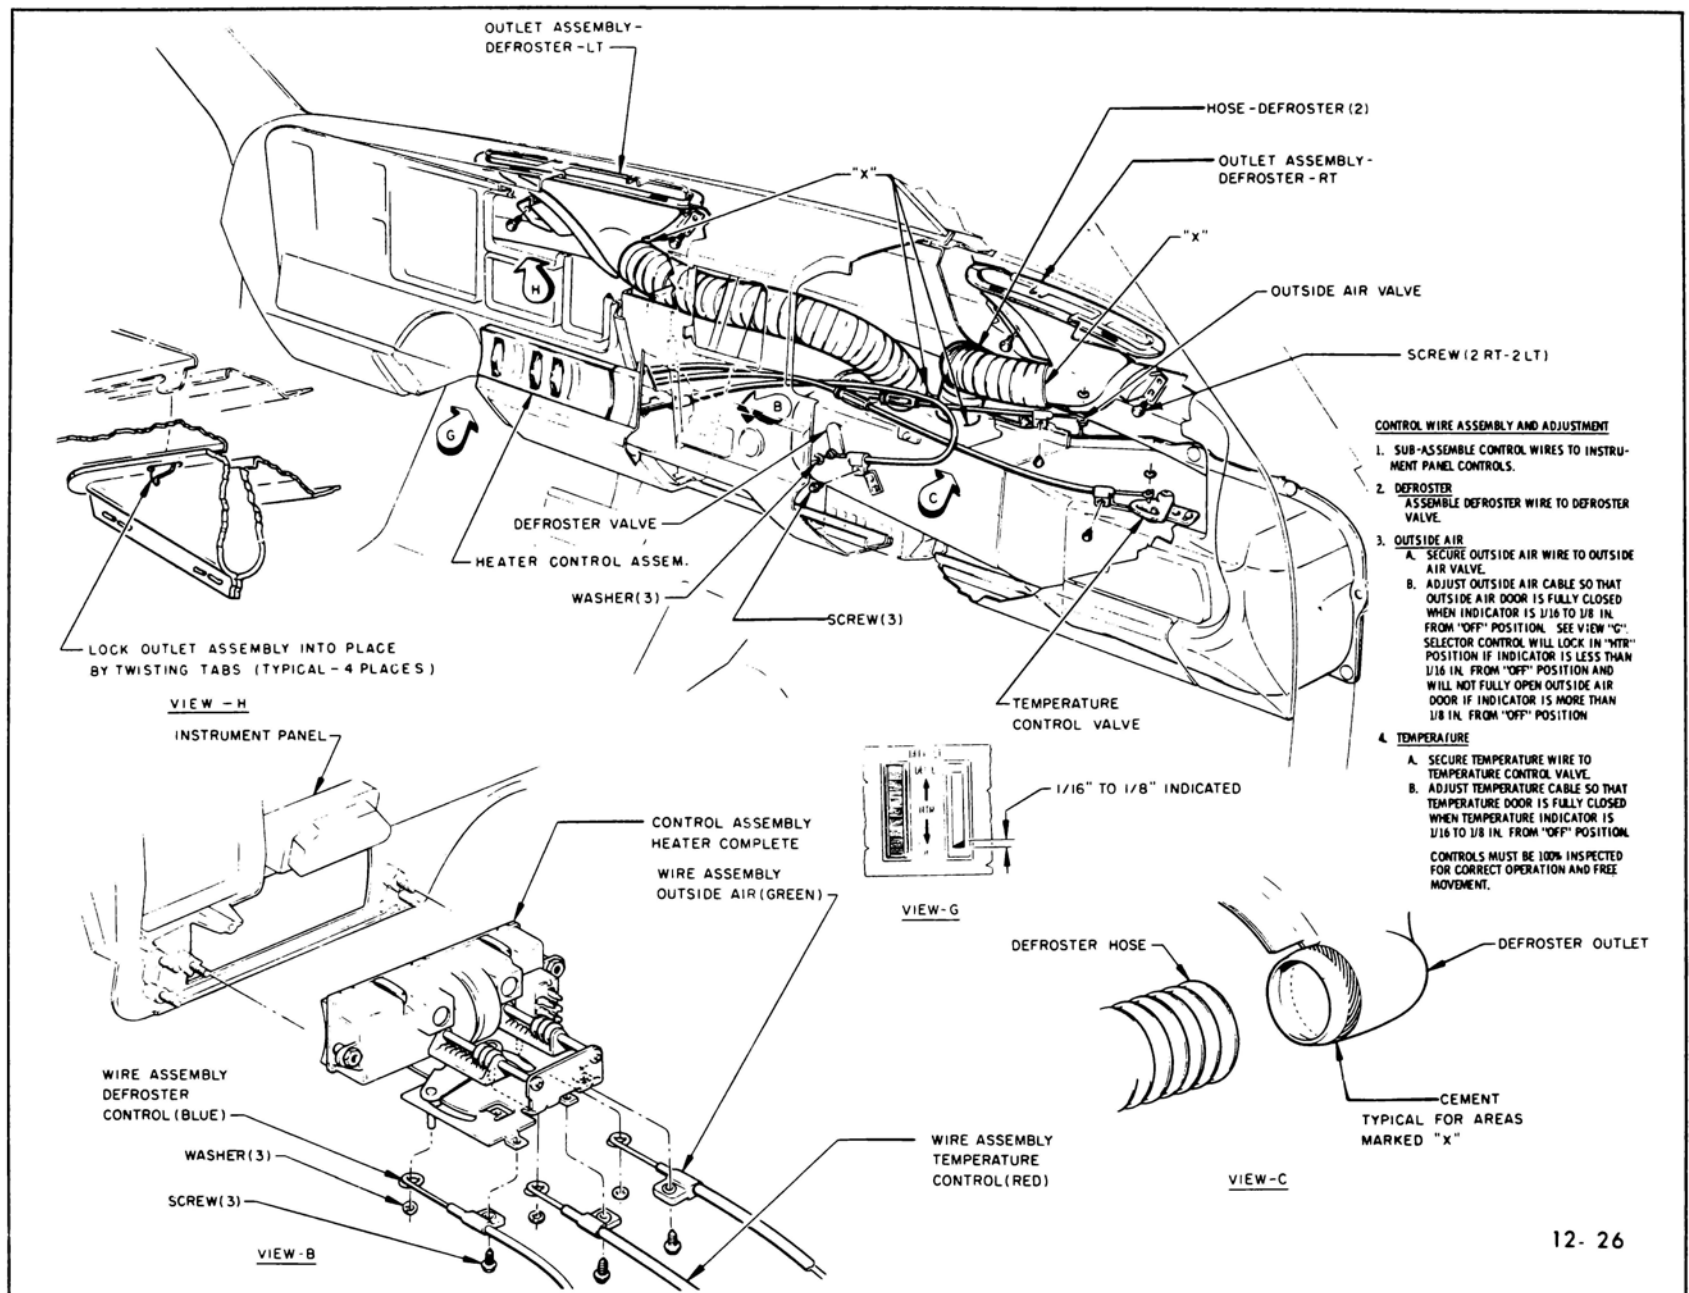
Heater Control Wire and Defroster Hose Installation
